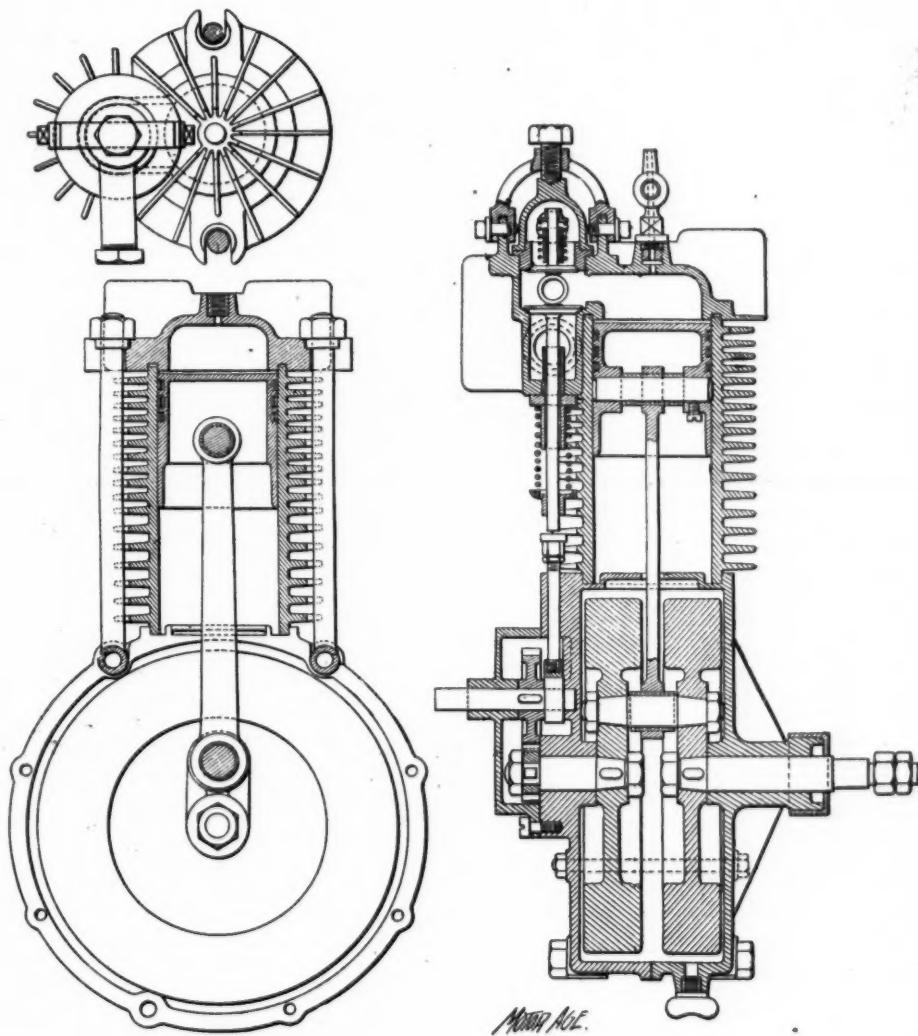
TWO SECTIONAL VIEWS OF A SINGLE-CYLINDER, AIR-COOLED, UPRIGHT GASOLENE MOTOR WITH PLAN VIEW OF CYLINDER HEAD.
